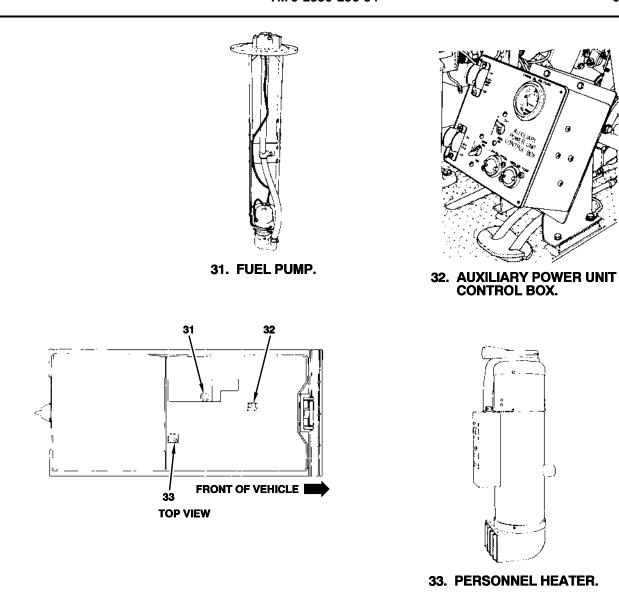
Location of Major Components, Assemblies, and Auxiliaries (Sheet 7 of 8).
